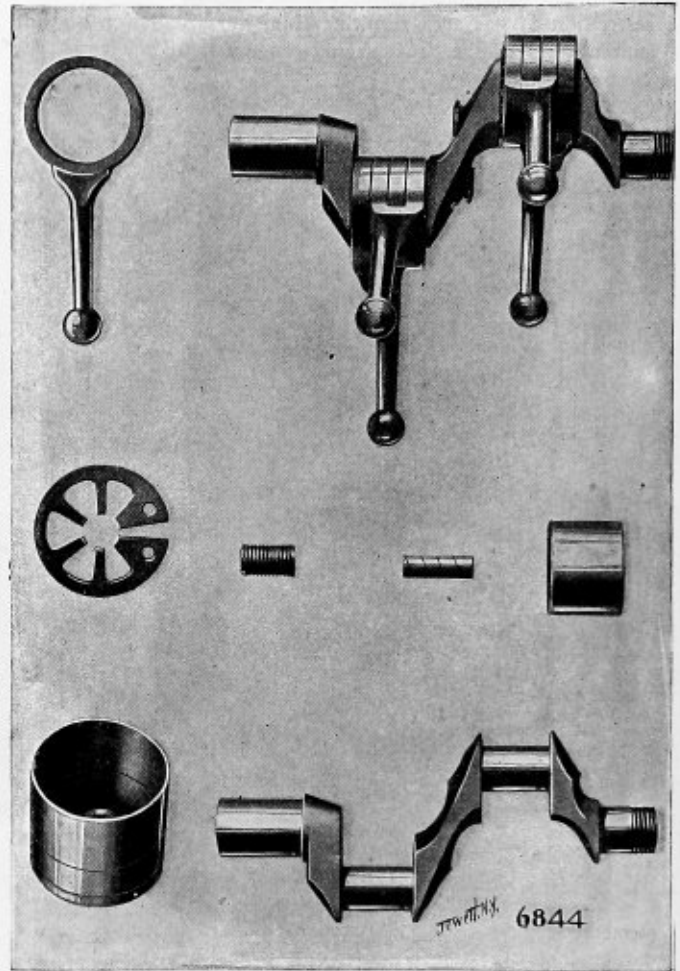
Crank Shaft, Connecting Rod, Piston Retaining Spring and Roller Bearings of "Little David" Drill
